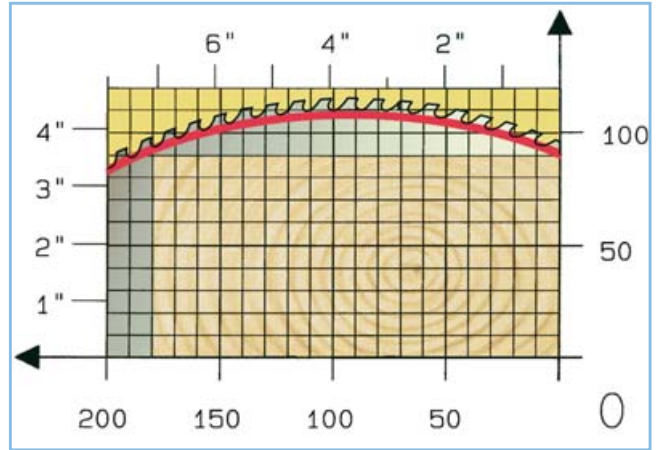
Cutting diagram with 500 mm Ø saw blade
